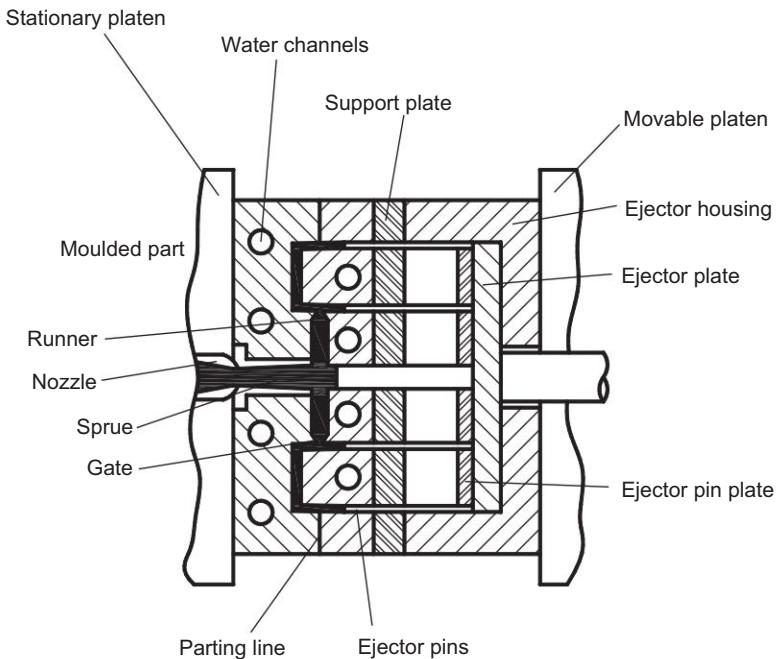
Schematic of a two-plate mould with a single cavity
